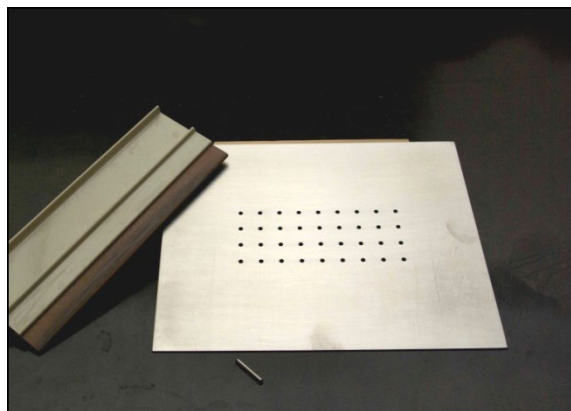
Equipment used for manufacture of inert primer pellets.
